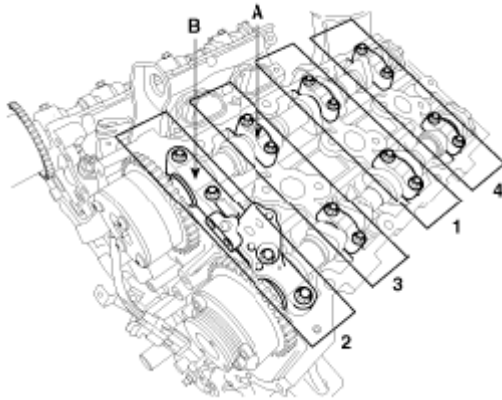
Identifying LH Camshaft Bearing Cap & Thrust Bearing Cap
